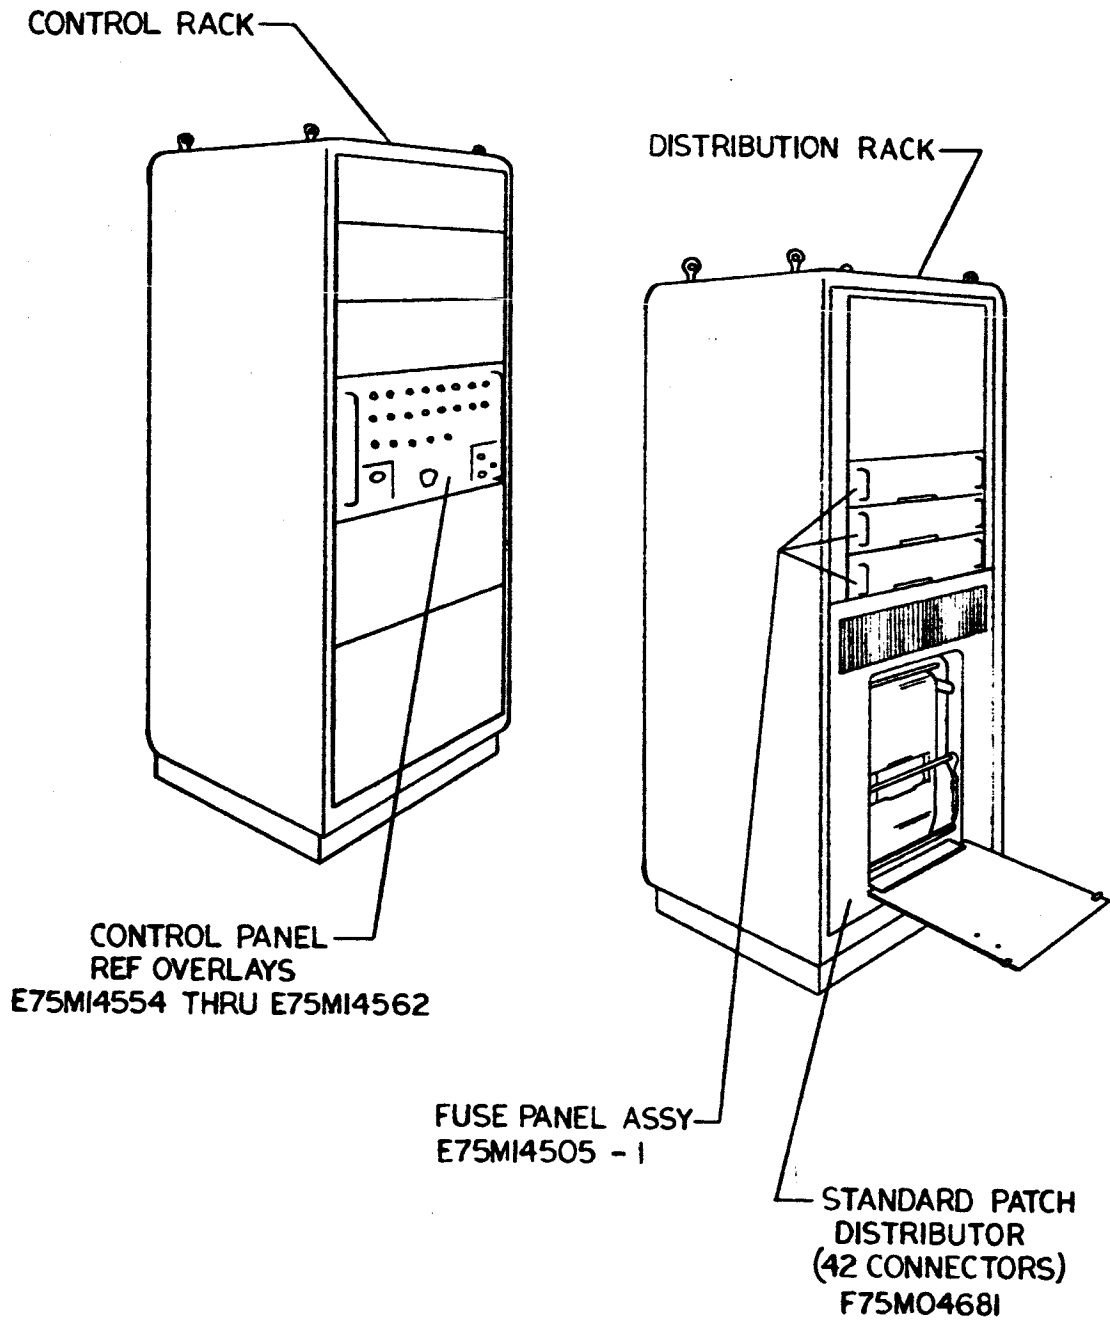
Control and Distribution Racks, Service Arms Test Site
